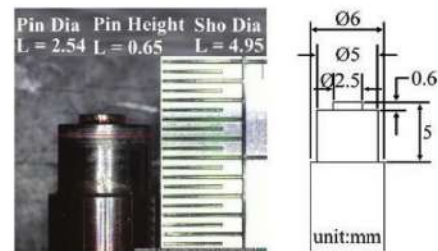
Dimension tool of micro-Friction Stir Spot Welding
